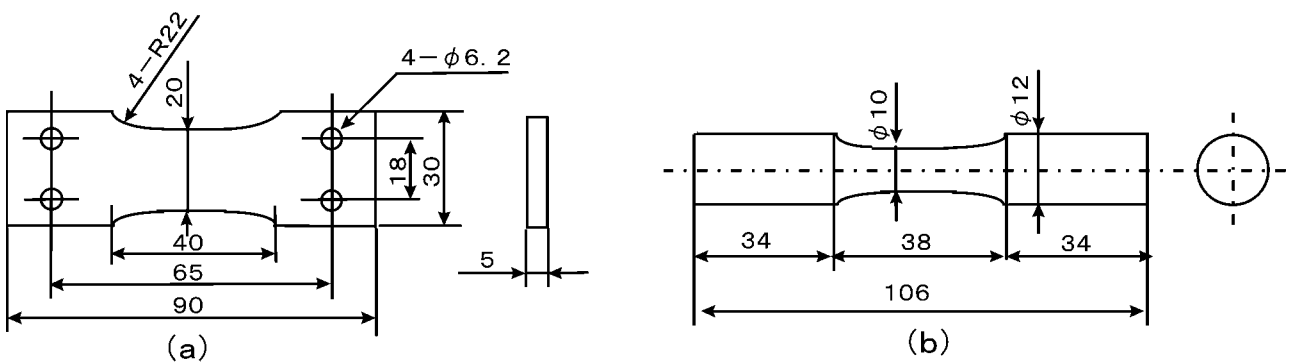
Shape and dimensions of fatigue test specimens (unit : mm)
